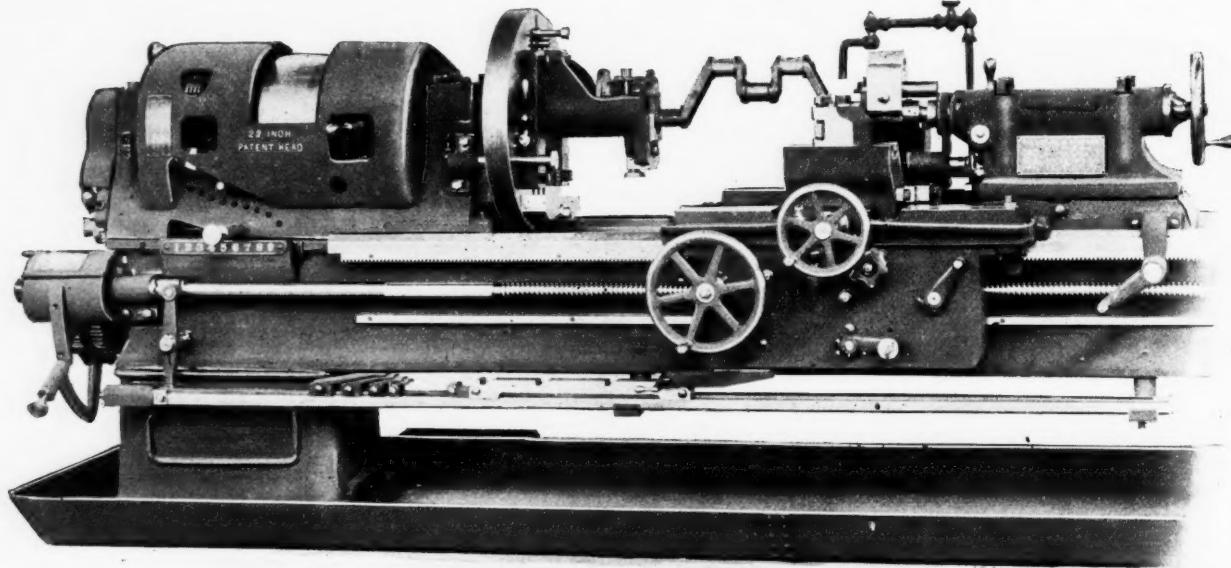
Lathe, provided with Special Chucks, Tool-posts and Stop Mechanism for Turning Crank-shafts
